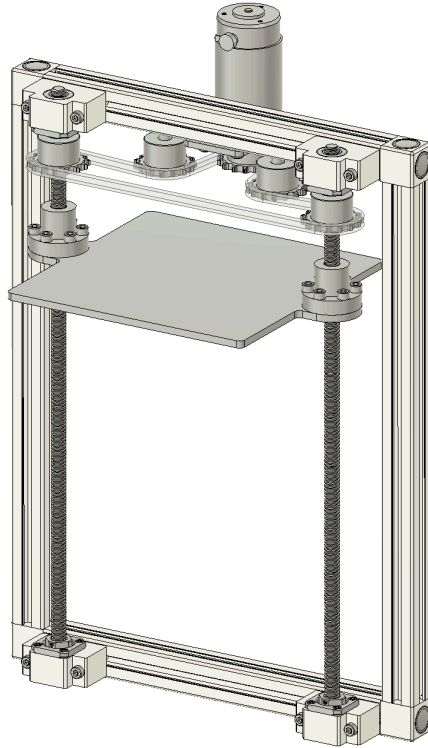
CAD model of our trash compactor without exterior housing and bin
